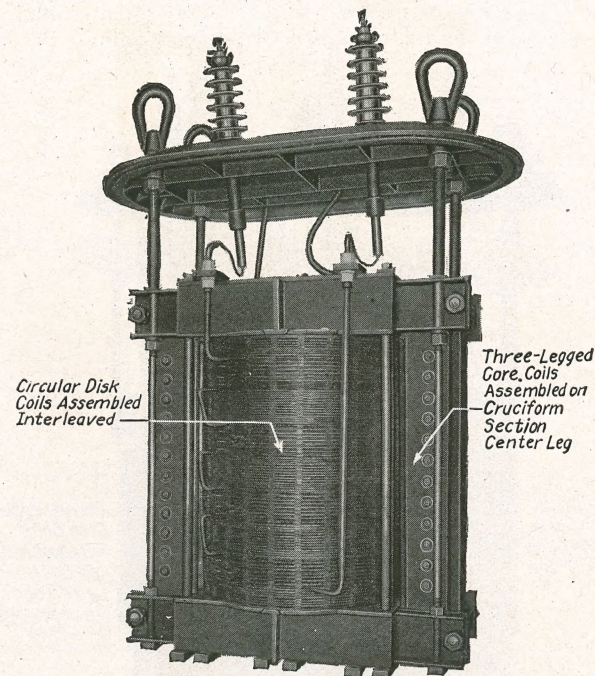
SINGLE-PHASE, INTERLEAVED DISK COIL DESIGN, USING THREE-LEGGED CORE
